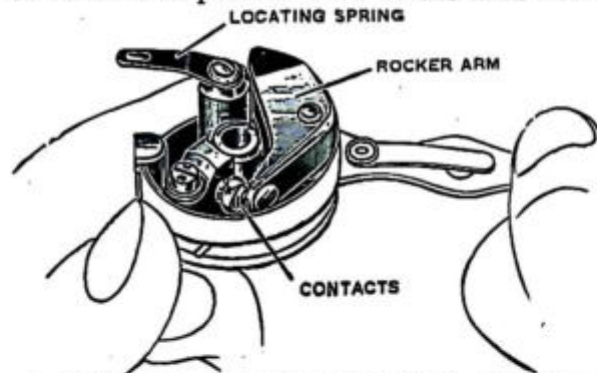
VIEW OF CONTACT BREAKER SHOWING METHOD OF REMOVING ROCKER ARM FOR CLEANING CONTACTS.
